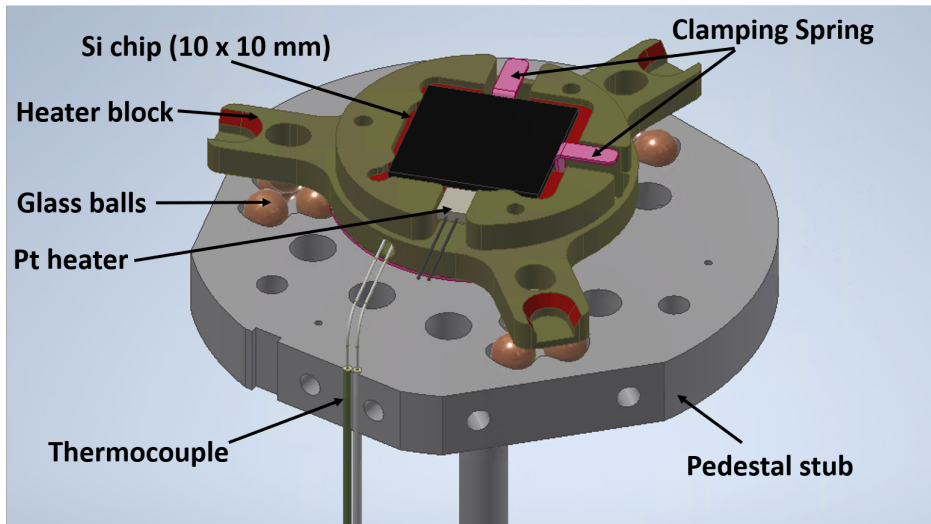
CAD drawing showing the substrate heater with a Si chip ($10 \times 10 \text{ mm}^2$) mounted on the heater block, which is in turn mounted over the pedestal stub using the glass balls in tetrahedron configuration. Also shown are the clamping springs which are used to mount the Si chip.
